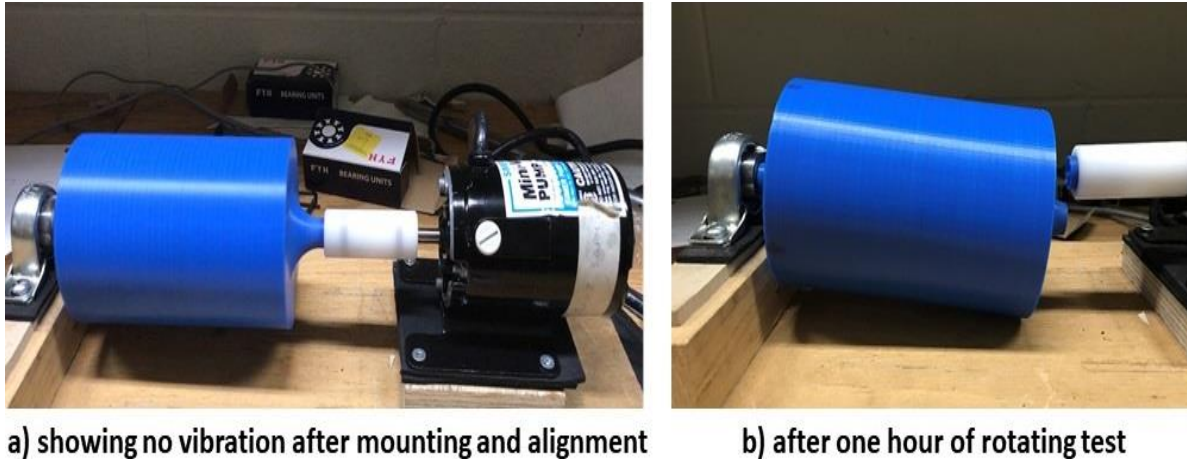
3D printed rotating drum and shaft as one piece: a) showing no vibration after mounting and alignment, and b) after one hour of rotating test.
